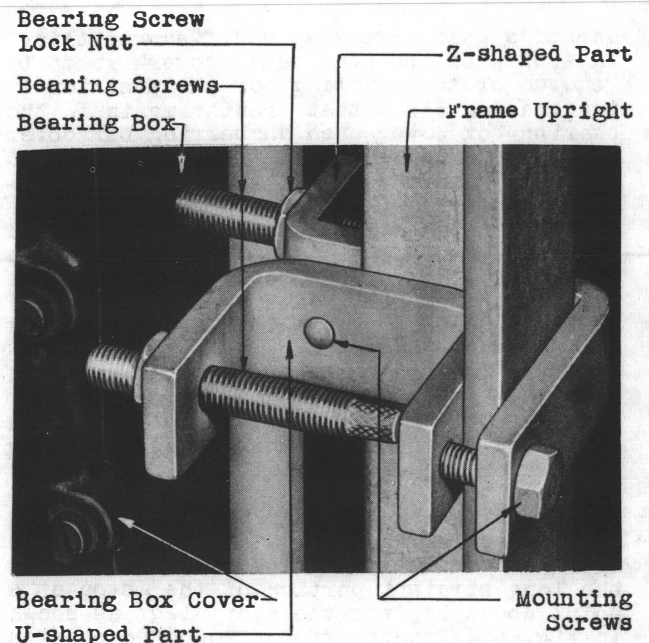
D-159143 and D-159463 Bearing Box Stop
